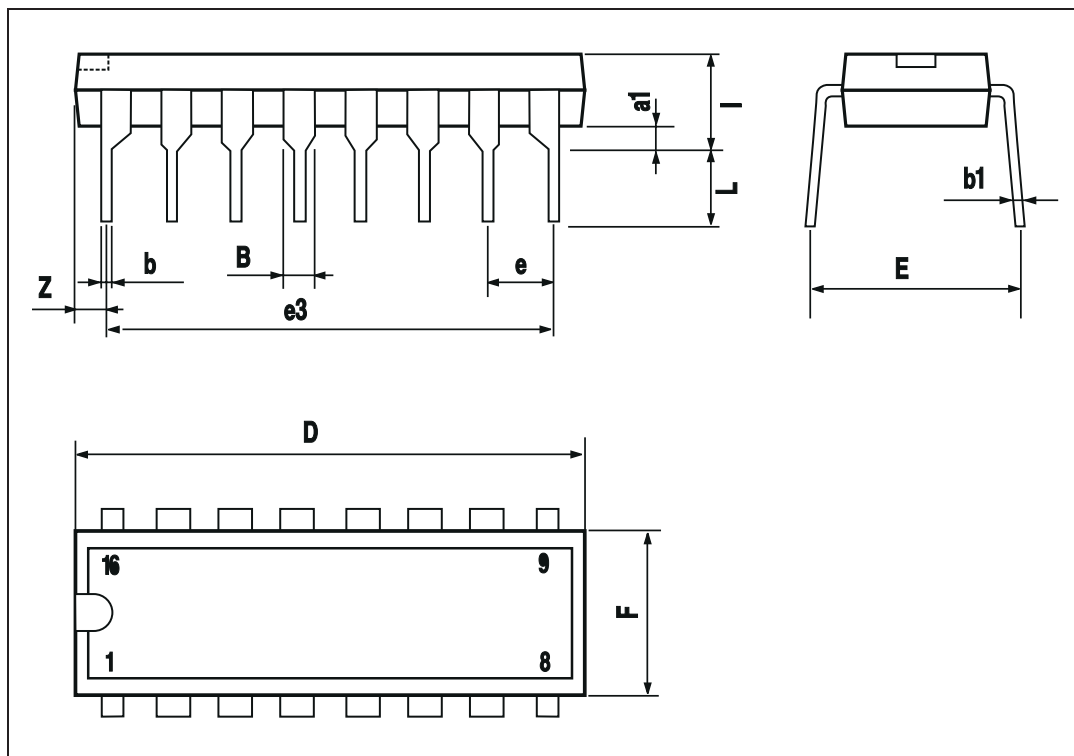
DIP16 Mechanical Data &amp; Package Dimensions
